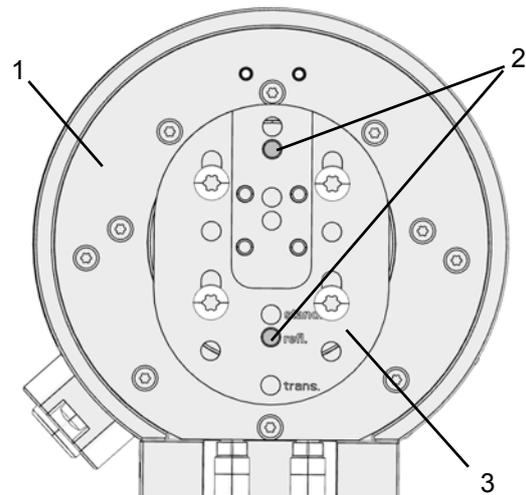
Mounting the adapter stage on the chamber for use with different sample holders
